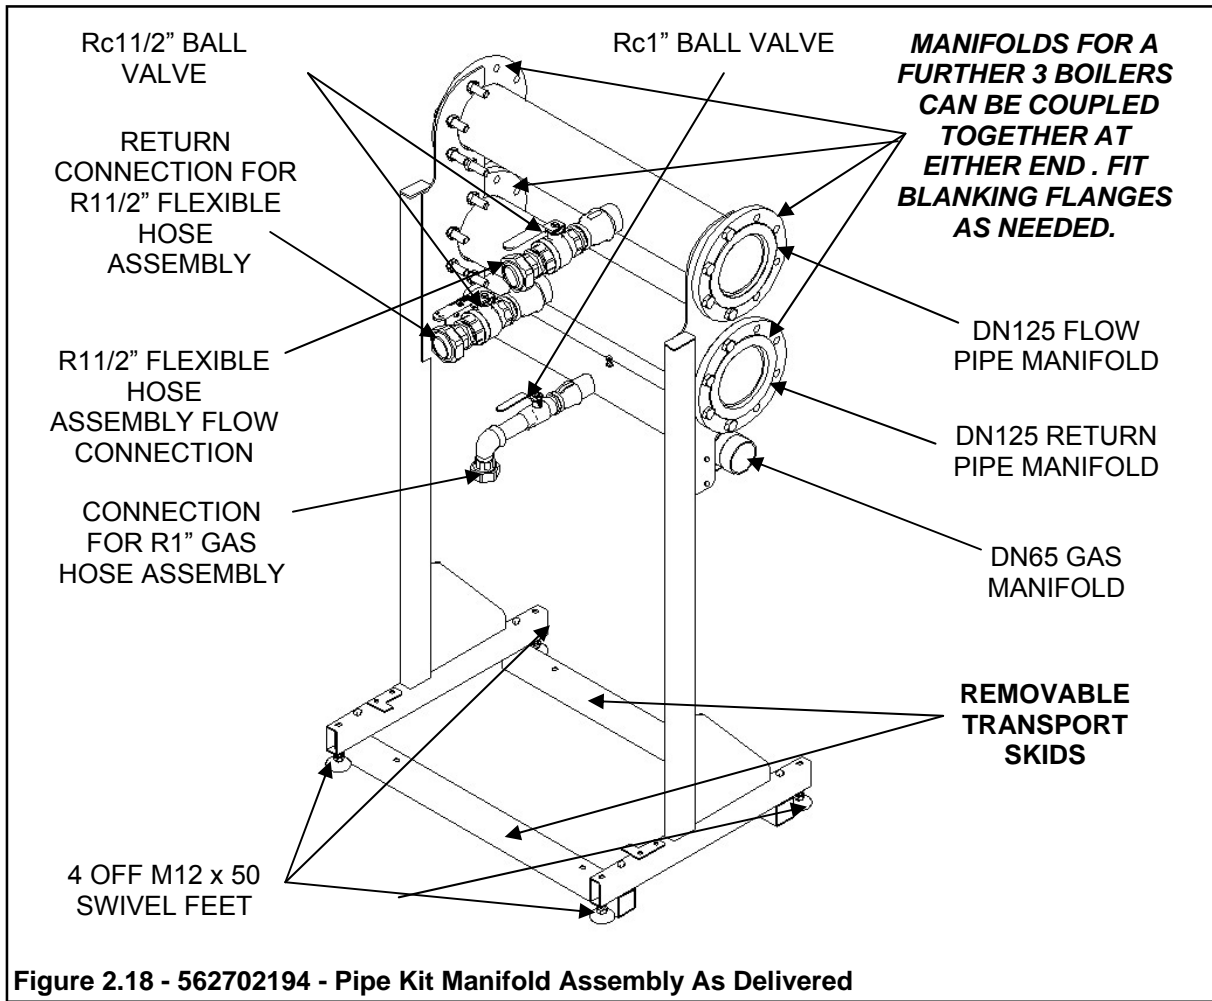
562702194 - Pipe Kit Manifold Assembly As Delivered
